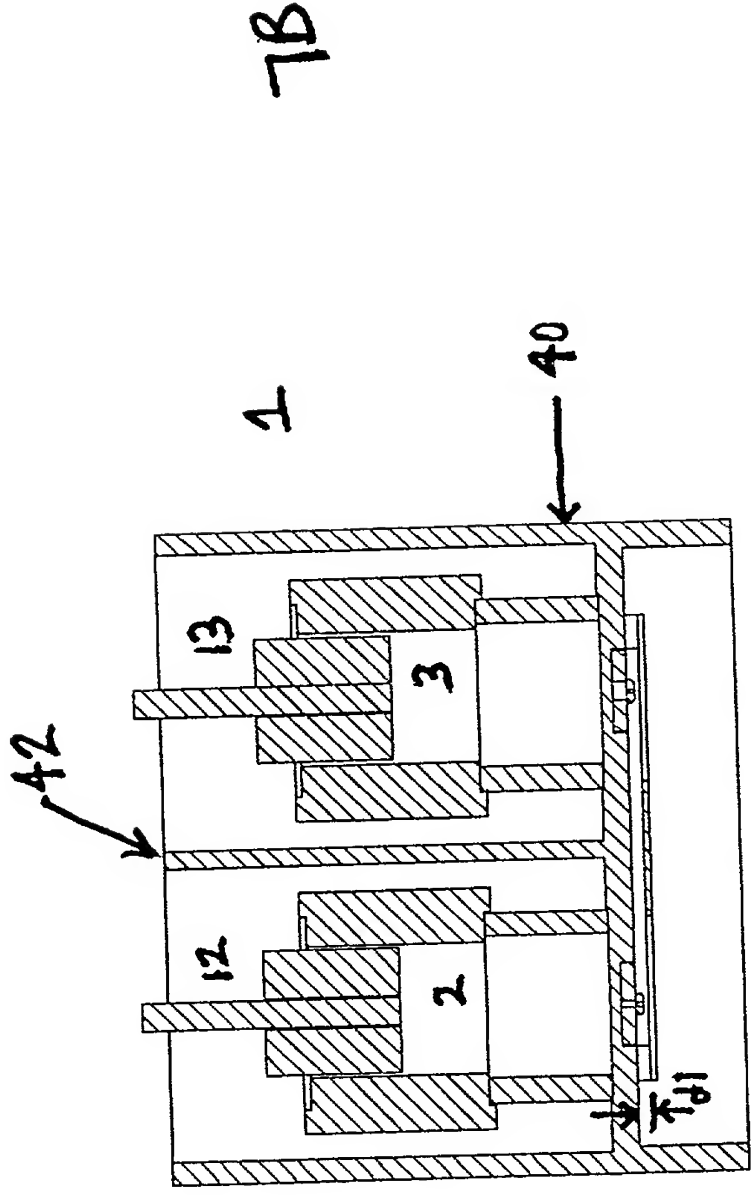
Front & Side View - Two-Channel Combiner Junction. Covers removed from drawing for clarity.
